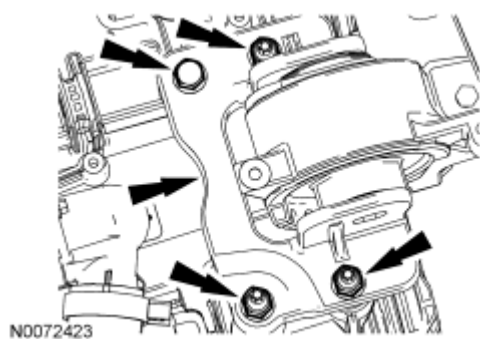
Identifying Bolt, Nuts And Mount Bracket
